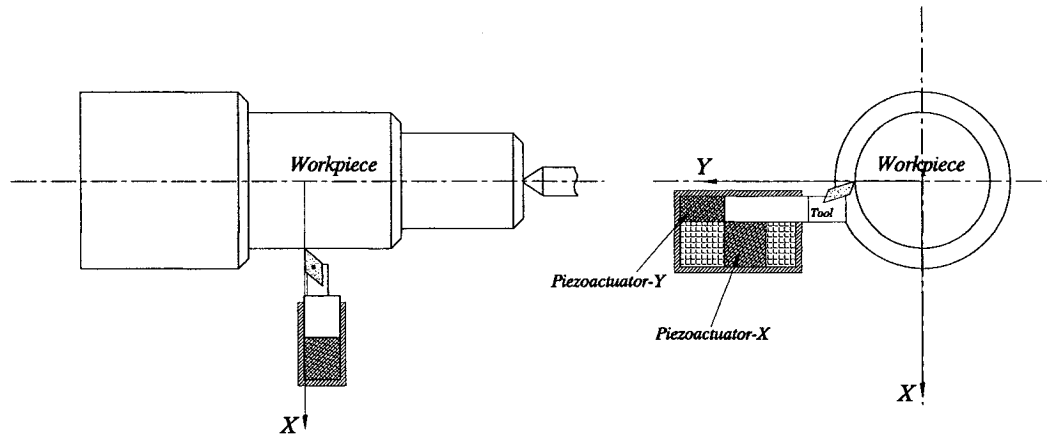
The scheme of turning tool with piezoelectric actuator
